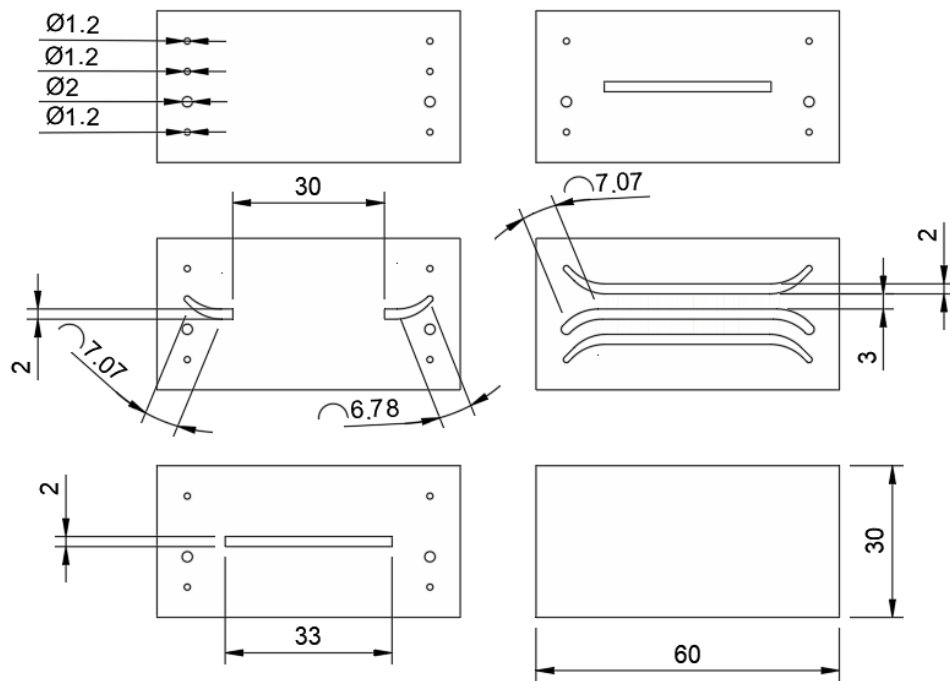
Technical drawing of the ISO-compliant microfluidic device showing the detailed geometrical layout and cutting dimensions of each layer. Measurements are expressed in mm.
